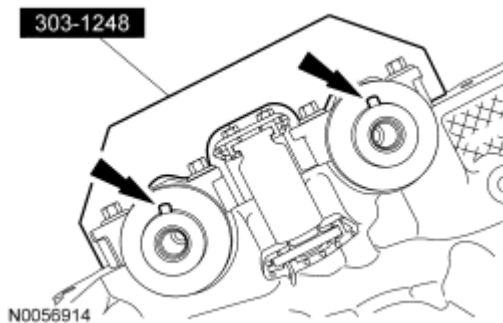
Installing Special Tool (303-1248) On Flats Of Camshafts
